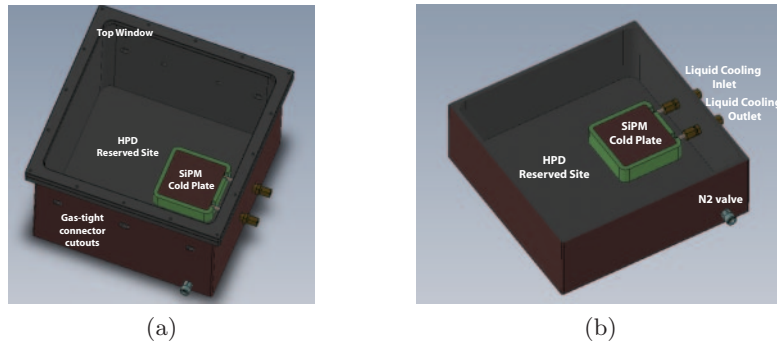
(a) External view and (b) cut side view of the focal plane demonstrator.
